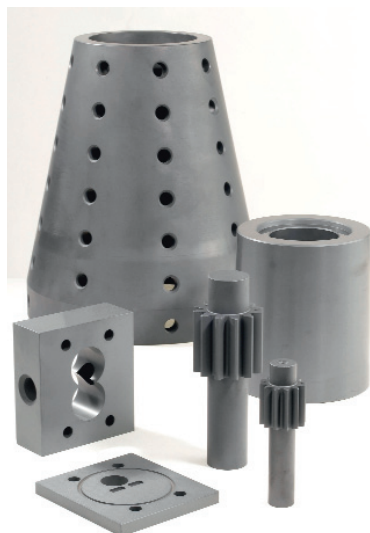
Rotor for attritor mill and gears with housing for a gear pump
